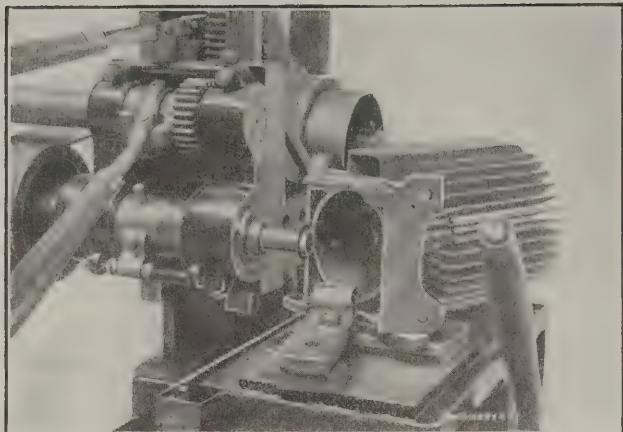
A Small Cutter Working on a Cylinder Casting.
